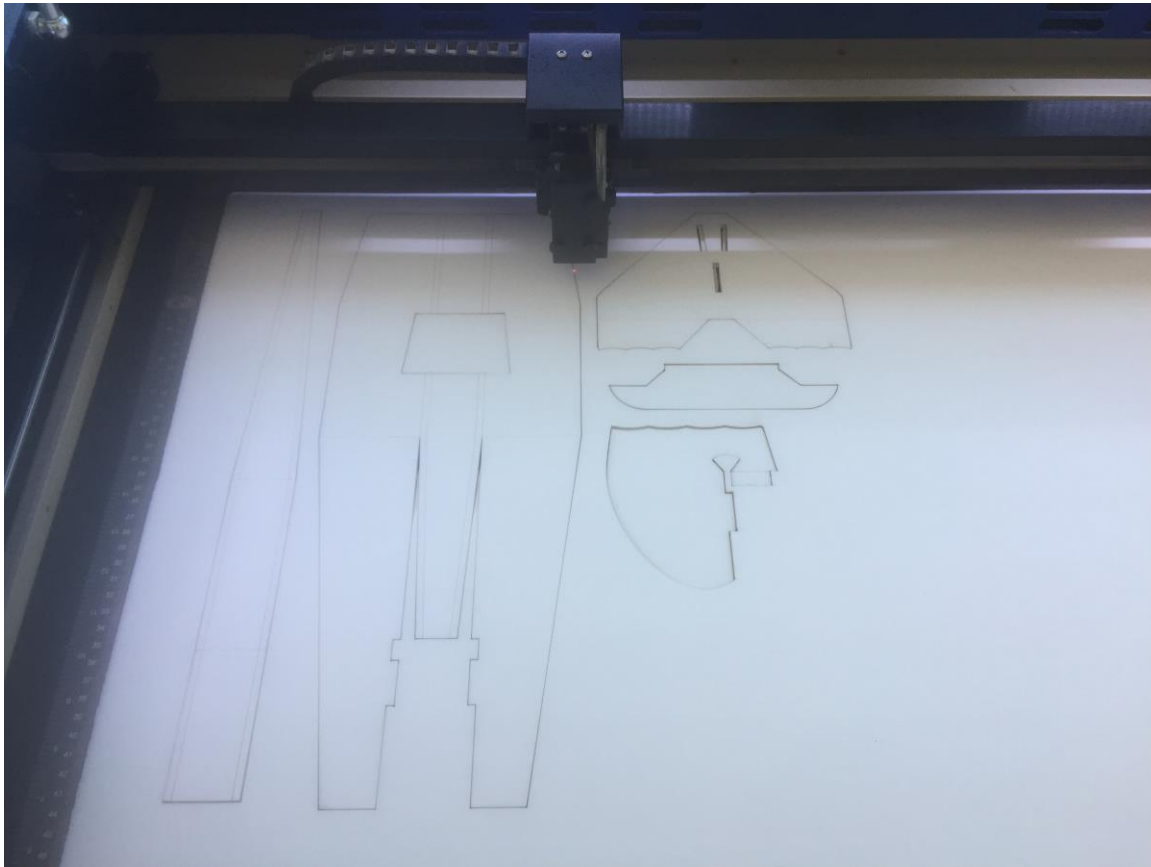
Modified Wings Being Cut by Spirit GLS Laser Cutter.
